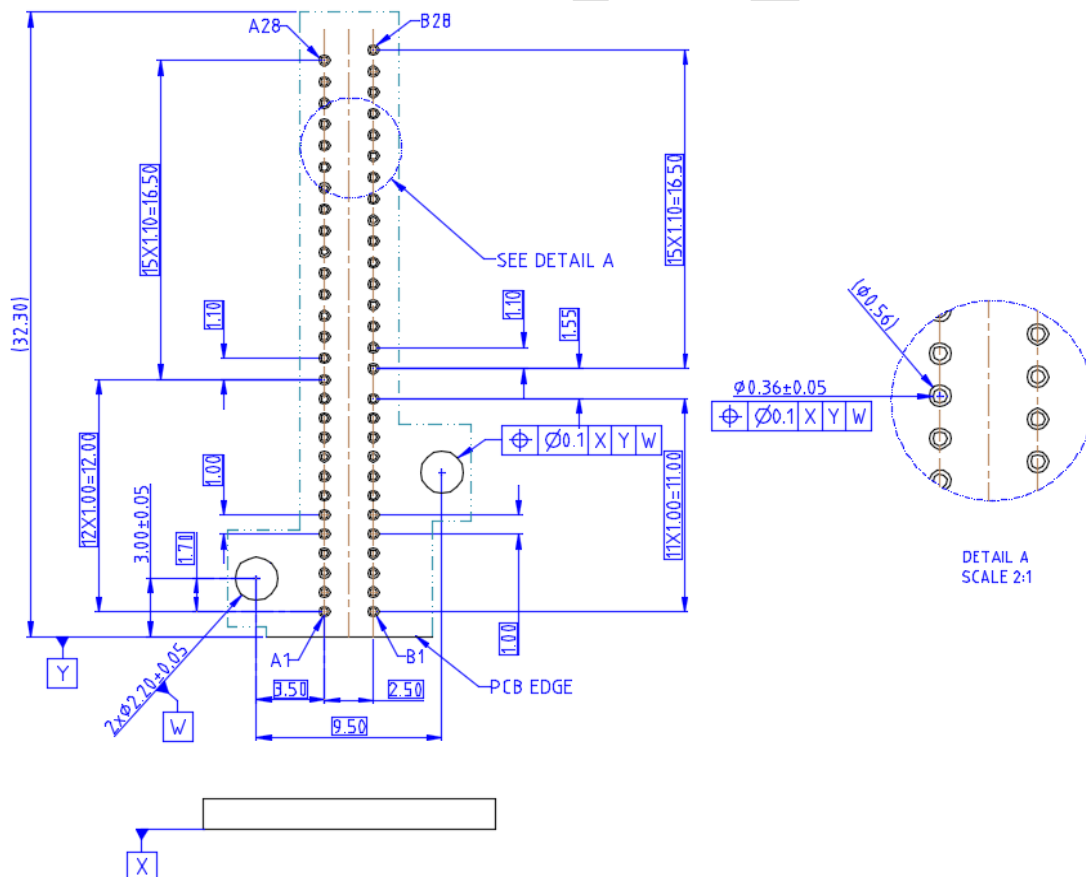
1C PRESS FIT ORTHOGONAL CONNECTOR FOOTPRINT (MM)
